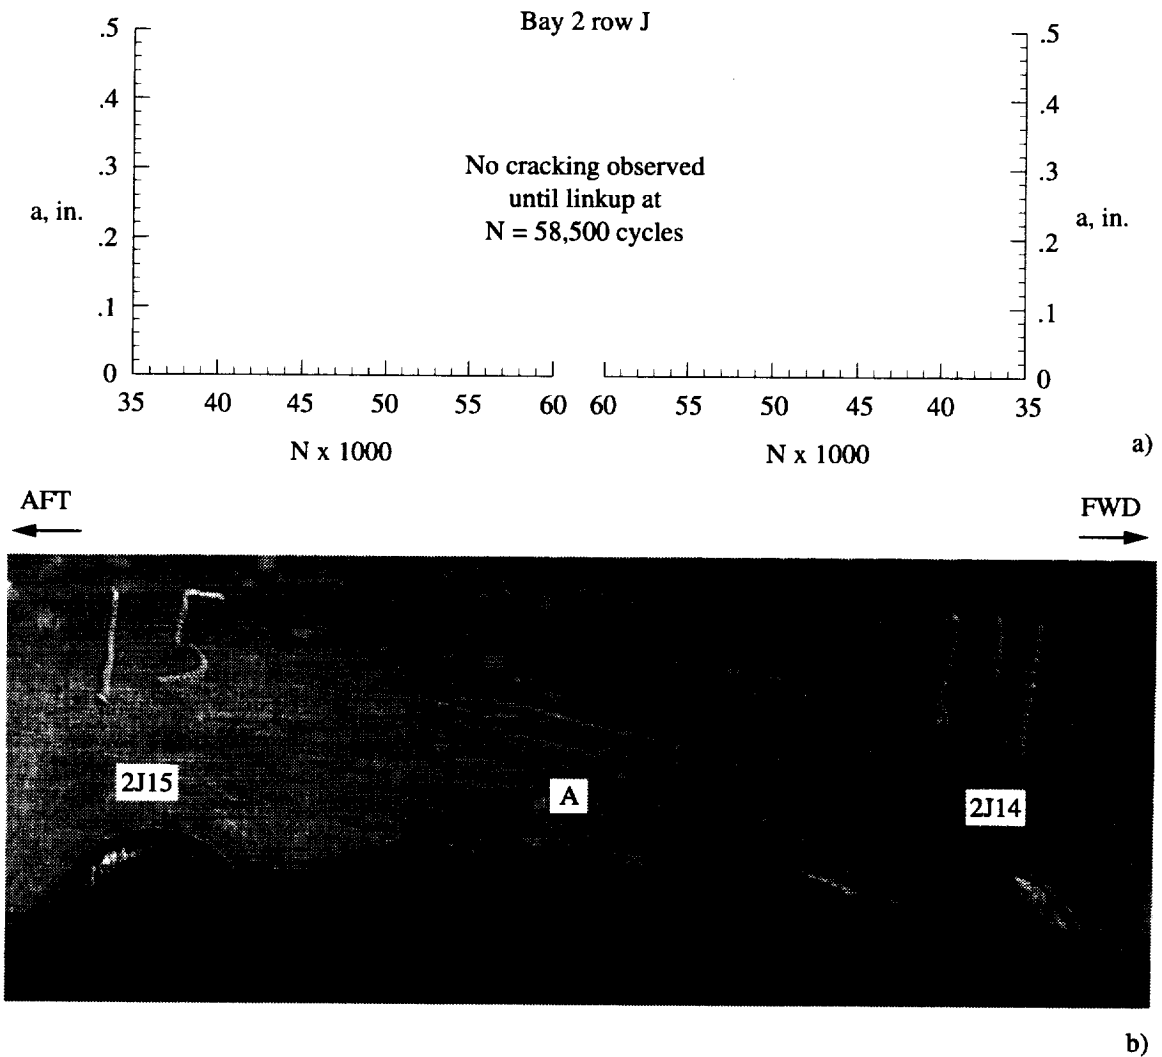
a) No visible cracks were observed between rivet holes 2J14 and 2J15 until after crack link-up. b) The photograph shows the upper portion of the crack surface between rivet holes 2J14 and 2J15. The region of crack link-up is less defined between holes 2J14 and 2J15, thus no crack link-up region is defined in Figure 7.21.b. Most of the crack surface shown in Figure 7.21.b exhibits a roughened appearance. This slant fracture region is characteristic of ductile tearing produced by relatively high crack tip stress intensity. The slant fracture region contains scratches normal to the direction of crack propagation indicative of fracture surface contact resulting from mode III displacement.
